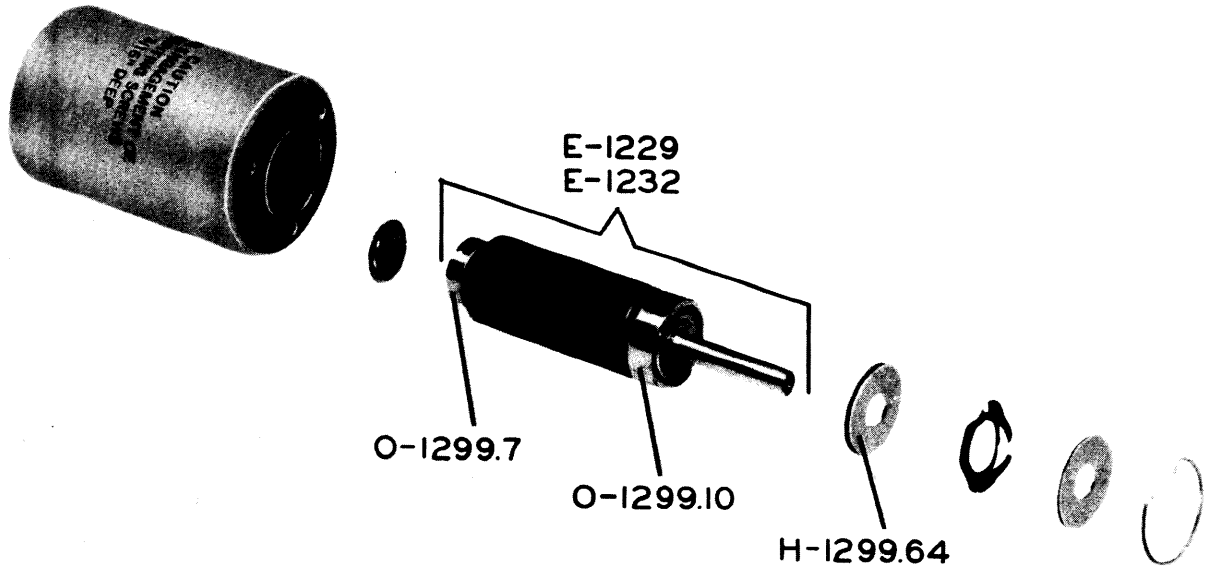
Blower Motor, B-1201 and B-1202, Induction Motor Corporation
